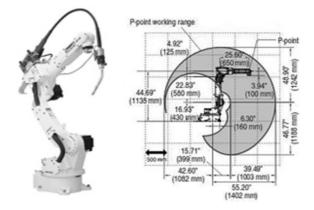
Welding robot OTC Daihen FD-V6 and its welding range [7]
